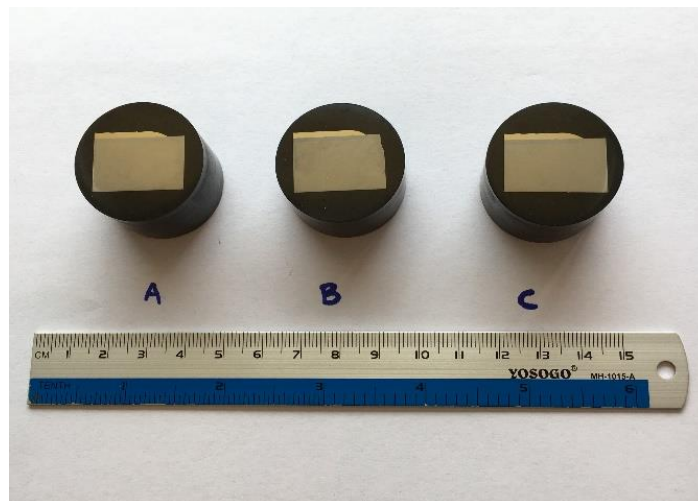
the cladding samples; (a) as welded; (B) PWHT and (C) QHT
